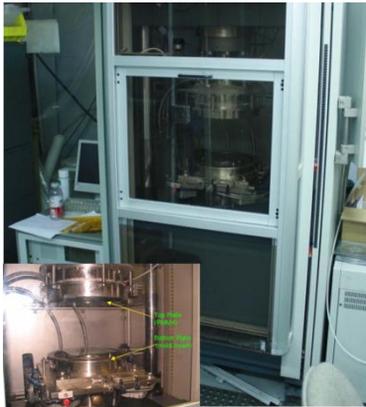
HEX 02 hot embossing machine installed at CAMD
